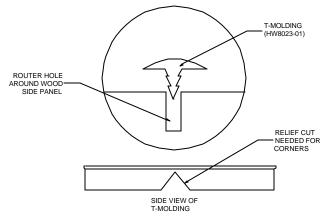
SIDE VIEW OF T-MOULDING IN ROUTER HOLE T-MOULDING WITH RELIEF CUT
